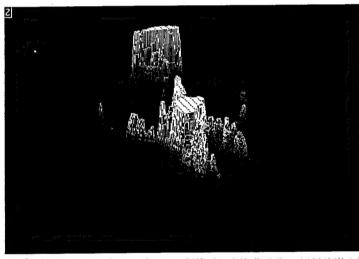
Ultrasonic images of flawed hole (CS07, hole 3 (0.039" & 0.071" flaws on left and right sides of bottom of countersink).
